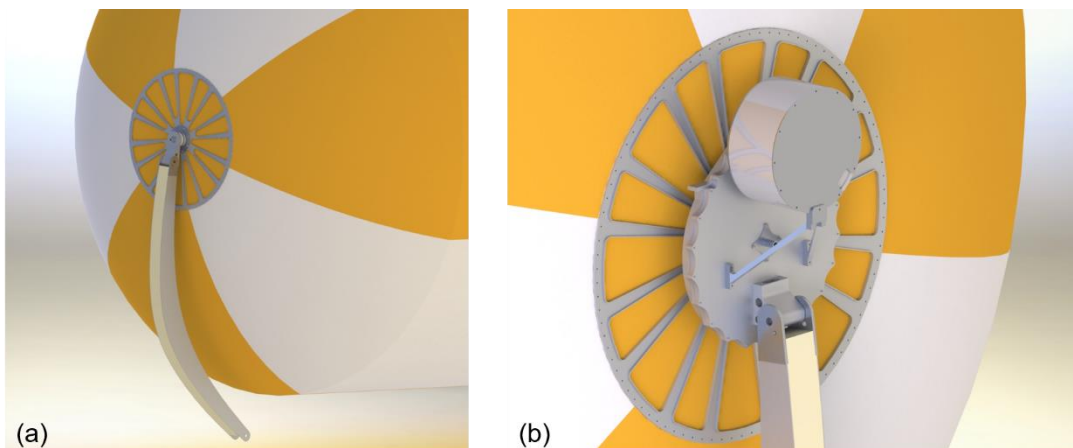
(a) Left end of the balloon, working as a “freewheel”; (b) right end of the balloon with the generator and drivetrain assemblies
